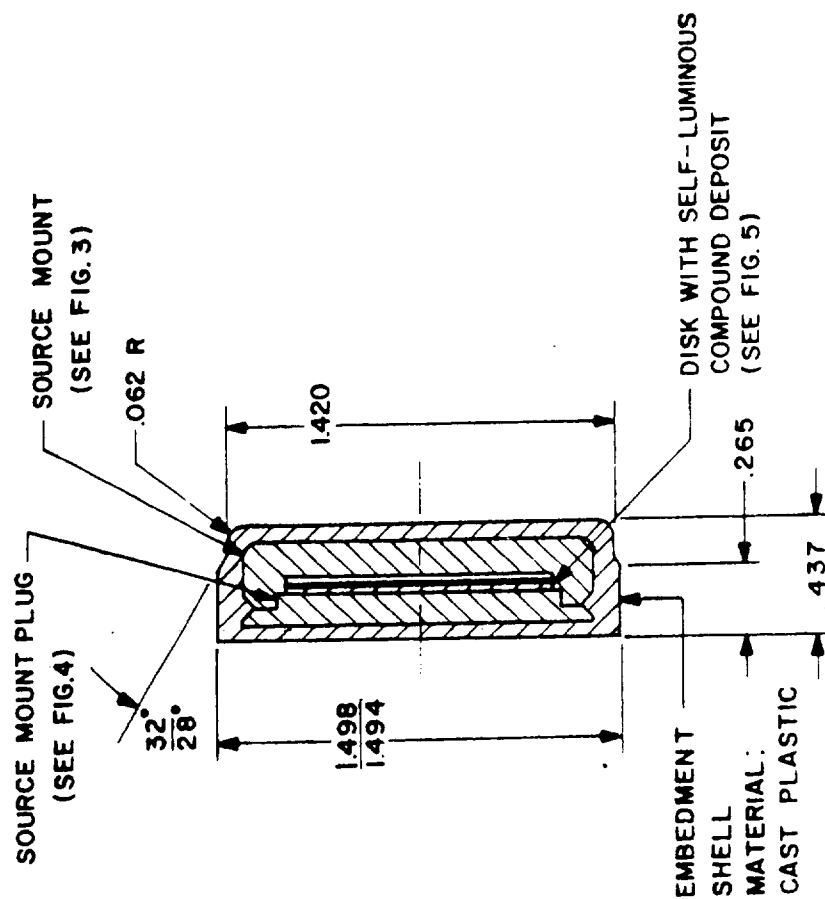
FIGURE I. TYPE I, PERSONNEL MARKER, ASSEMBLY.
